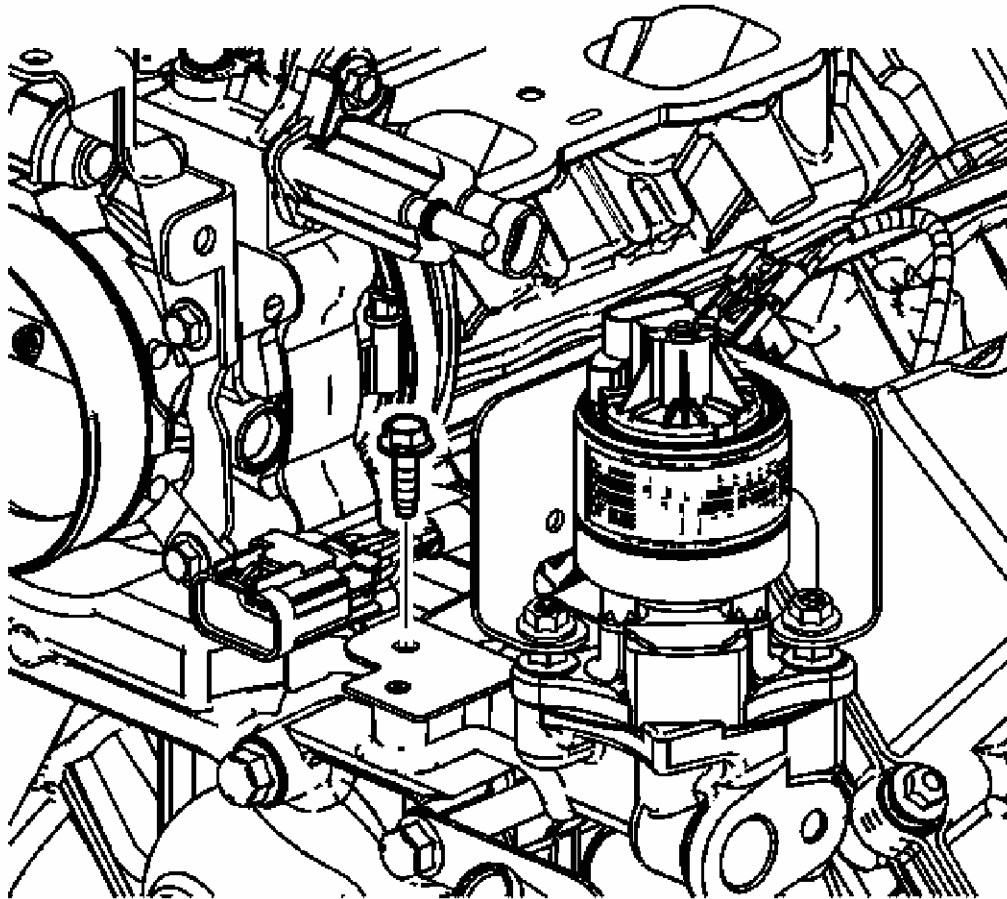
Identifying Crankshaft Position Sensor & Knock Sensor Wiring Harness Bracket Bolt
